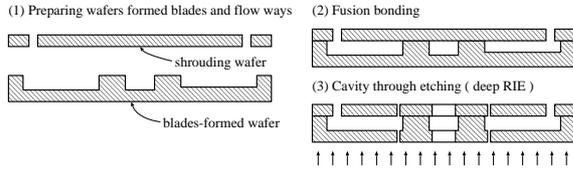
Fabrication process of a shrouded turbine with using cavity through etching
